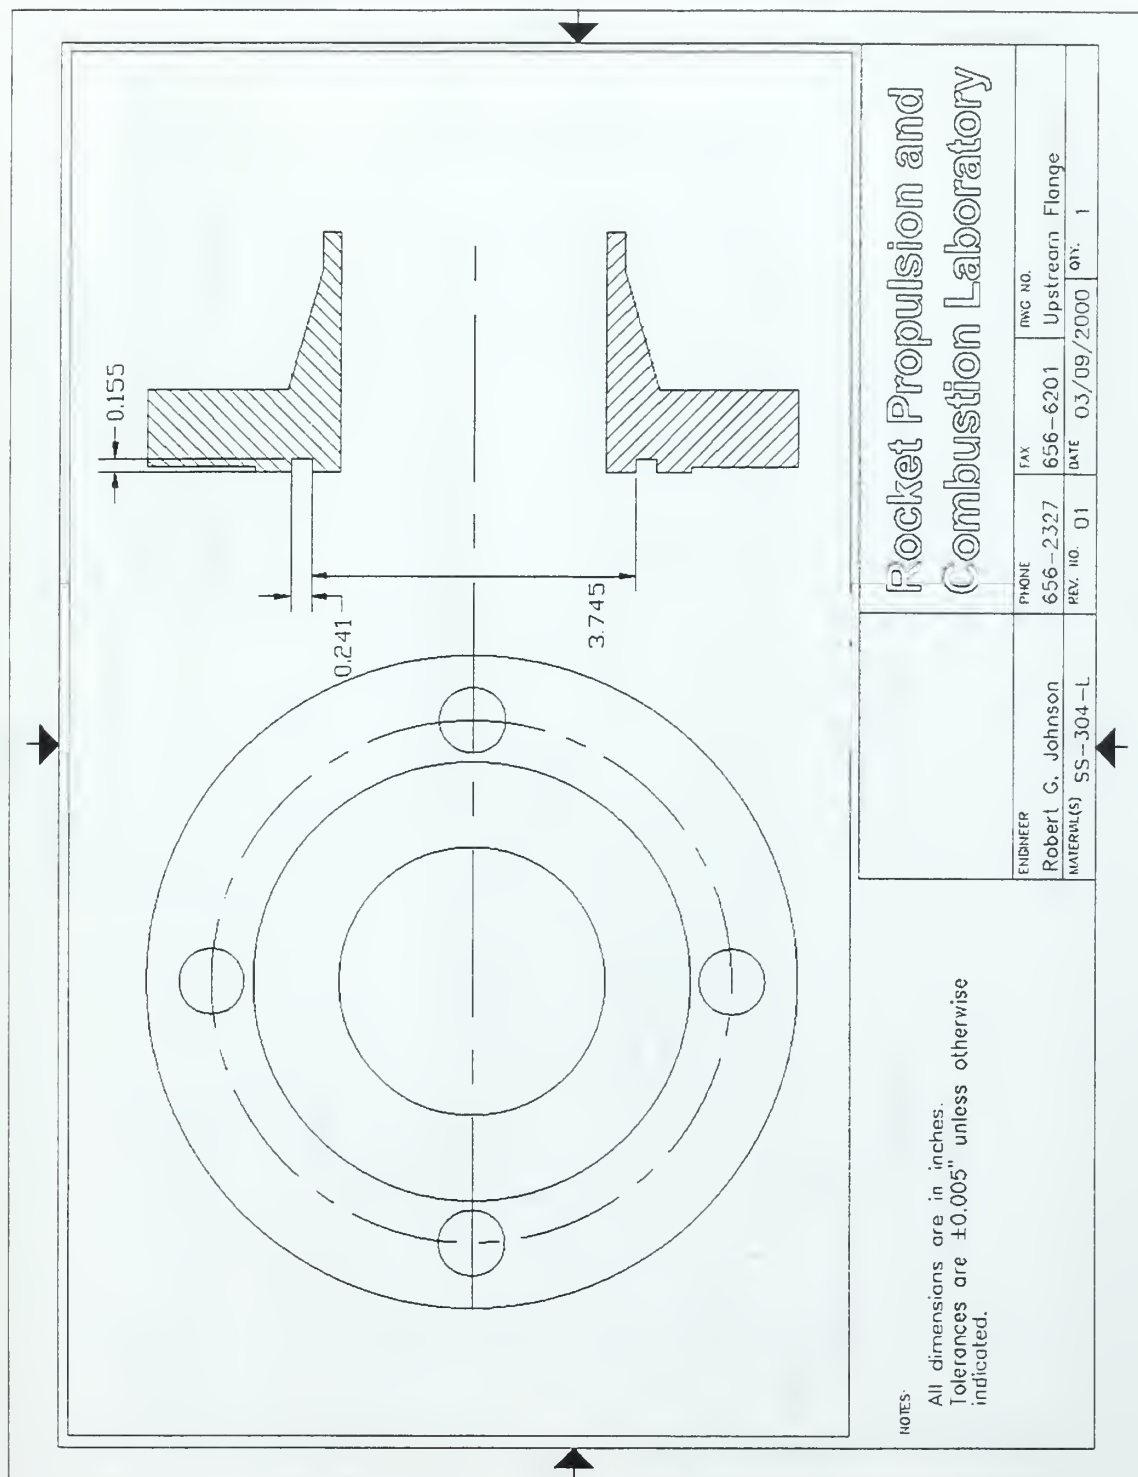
This flange was the upstream mount holding the Delaval choke in place just prior to the fuel injection manifold.
